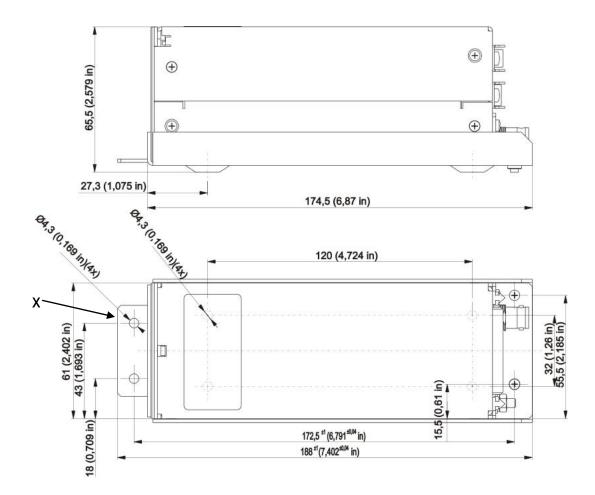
RT6201 mounting holes, dimensions in mm and (inches)
